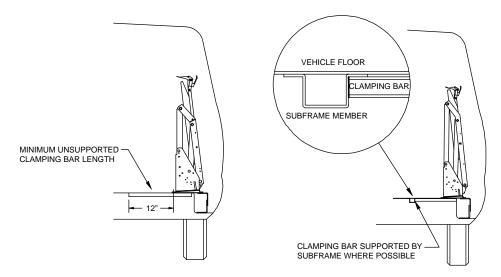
FORD VAN CLAMPING BAR ARRANGEMENT
